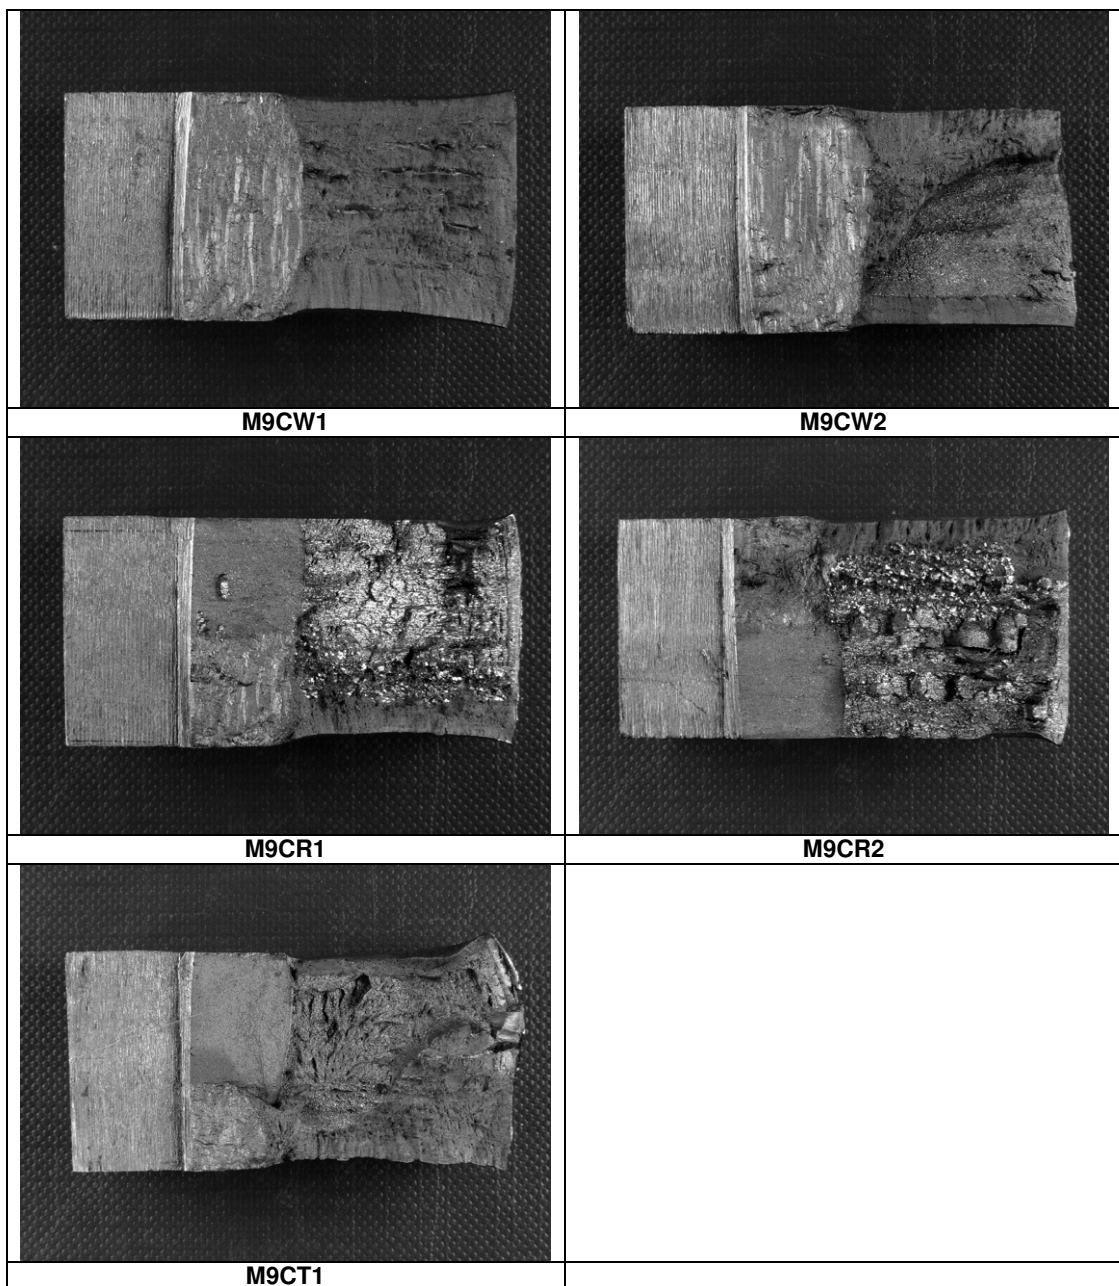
Fractographs of CTOD samples from 20 mm thick SMAW weld (M9).
